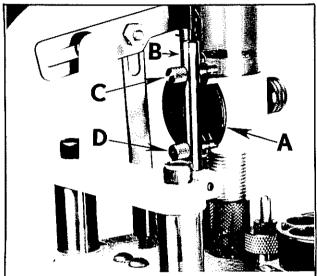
Components of Powder Charging System: Rotor (A), Rotor Cam Pin Holder (B), Rotor Cam Pins (C & D). Parts are in normal position with tool handle in down stroke. Top pin has engaged the cam, turning it part way. Bottom pin is in full engagement, powder has been discharged into case.
